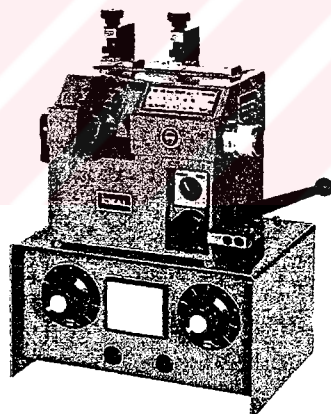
Resistance butt welding machine for wire welding [11]
